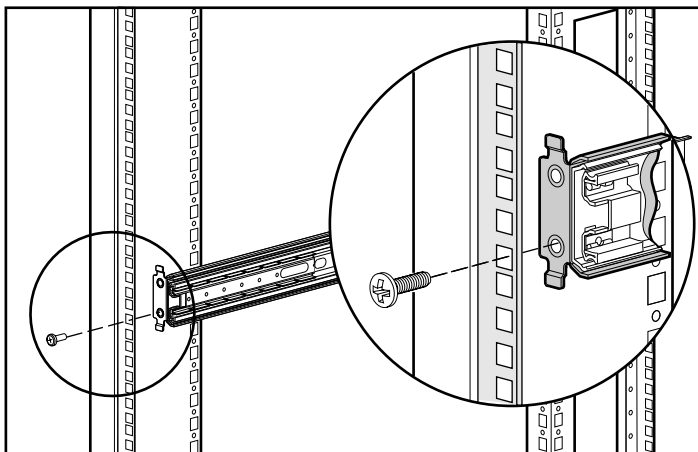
Attaching mounting bracket assembly to the front of the rack
